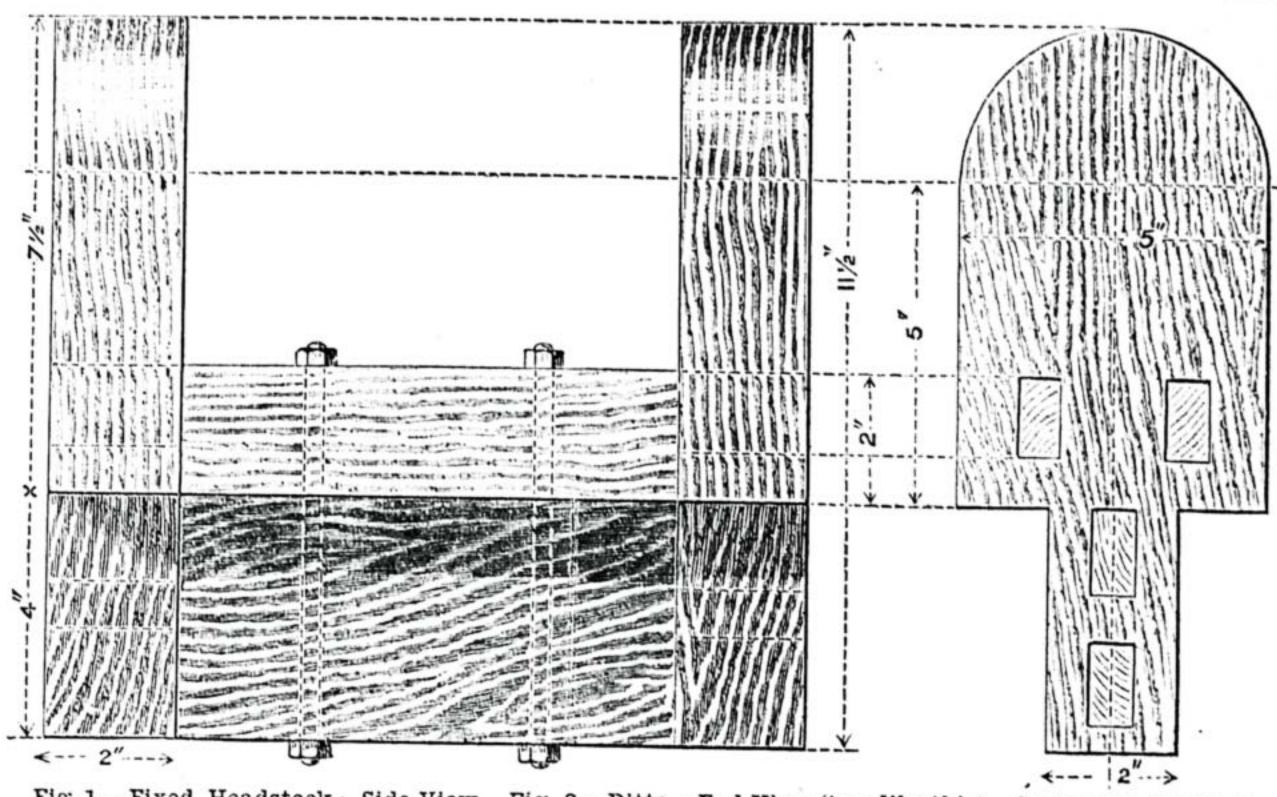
Fixed Headstock: Side View. Fig. 2.—Ditto: End View (two like this). Scale, 3 in. to 1 foot.
